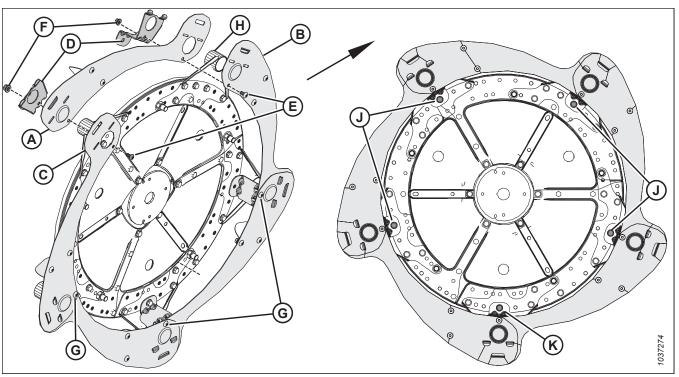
Five-Bat Reel – Assembled Reel Endshields on Reel
